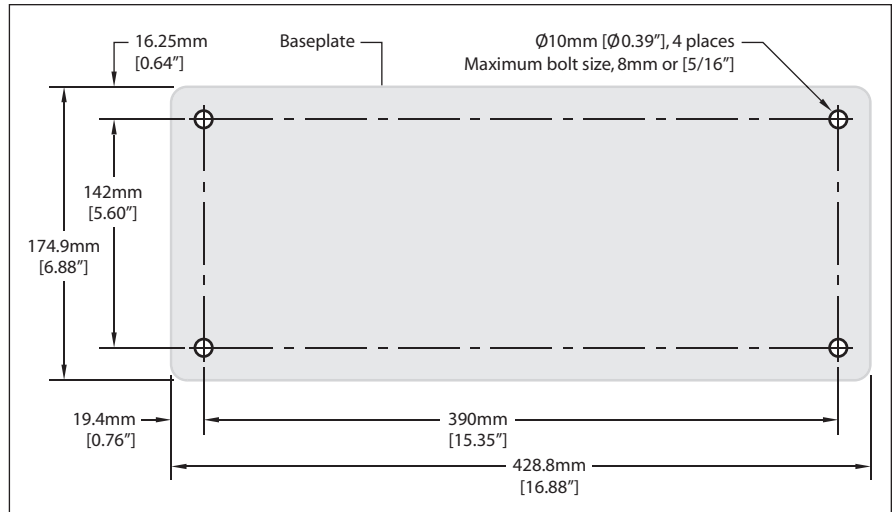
GaugeCalXP Pressure Comparator mounting hole pattern.
